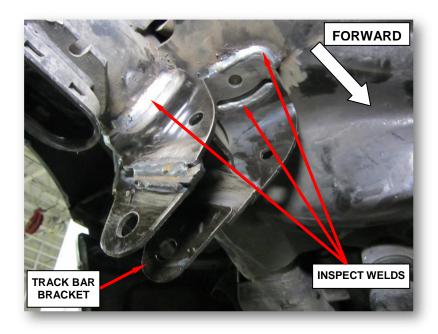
Suspect Weld Locations on Front and Back Side of Track Bar Bracket (Track Bar Removed for Photographic Purposes Only)
